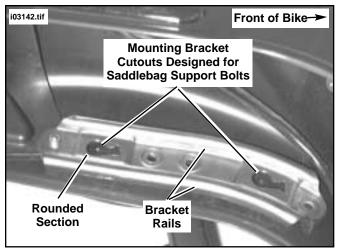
Bracket installed under Fender (Left Side Shown from Inside Fender)
